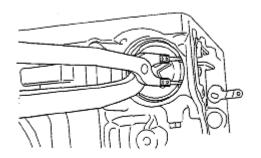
Inspecting Print Mark Of Brake Band Courtesy of MAZDA MOTORS CORP.
